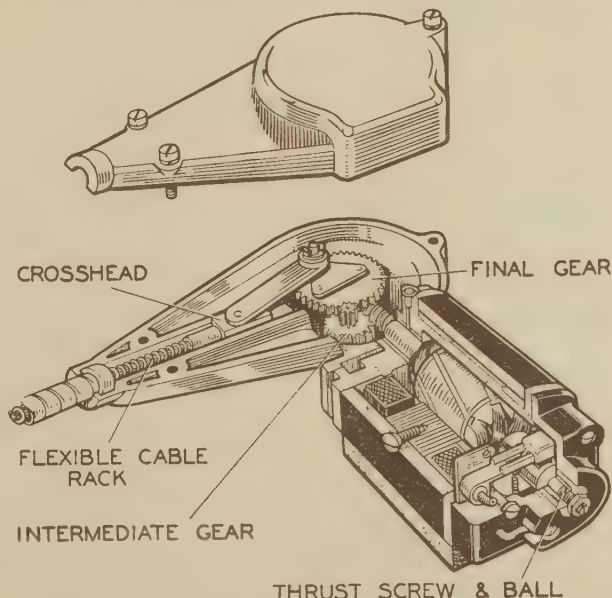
The Electric Motor and Operating Gear of Lucas Windscreen Wiper.
